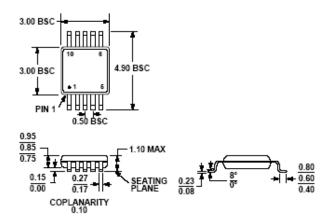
10-Lead Mini Small Outline Package[MSOP]
